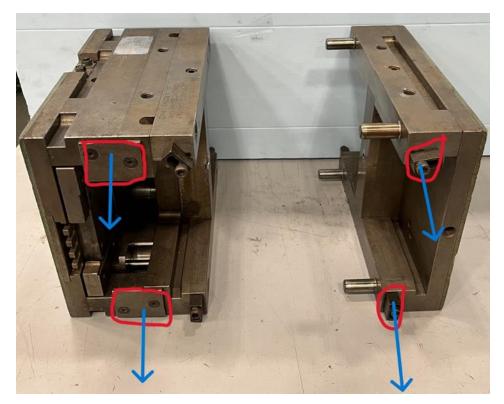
Mold frame with direction of jig placement (blue) and mounting location (red).
